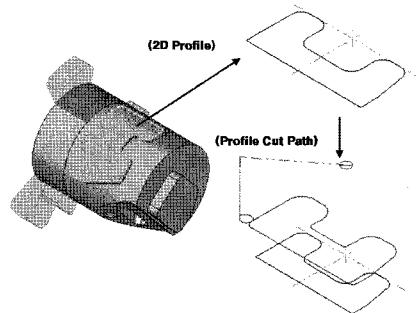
Example of 4-Axes Machining and 2D Machining Profile
